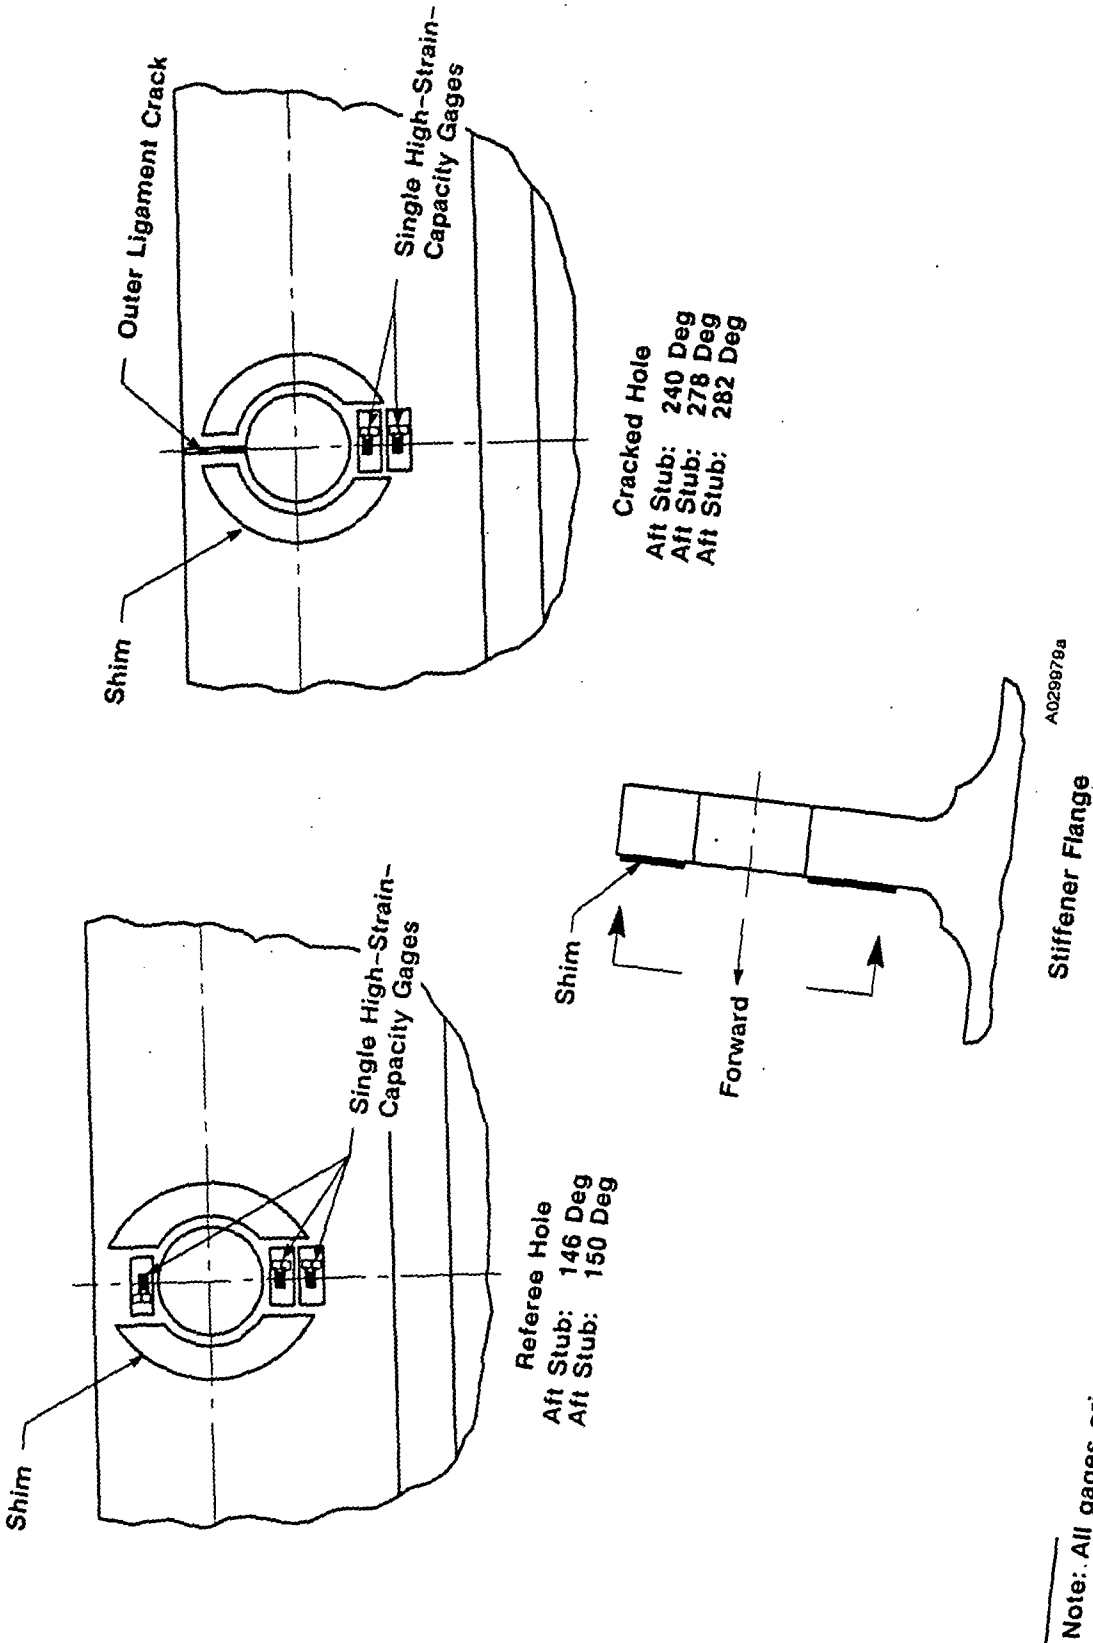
Stiffener Stub Outer Ligament Cracks and Instrumentation
